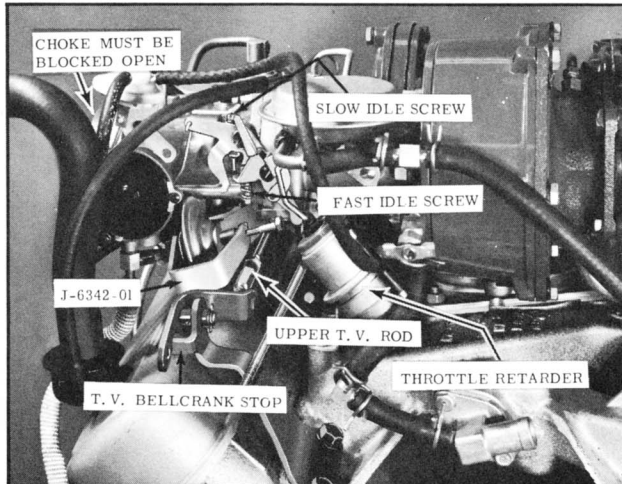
Throttle Return Check Holding Tool J-6342-01
